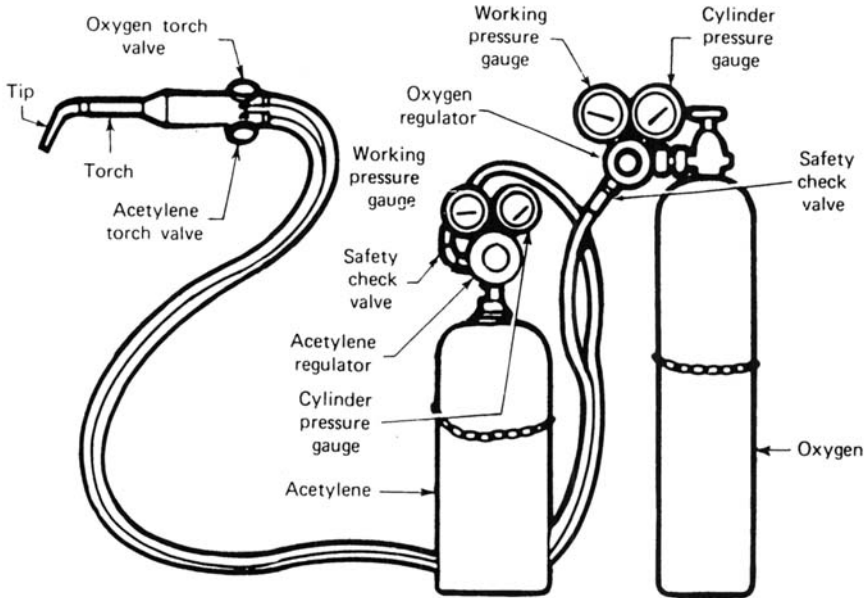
Gas welding. (Courtesy of Hobart Brothers, Inc.)
